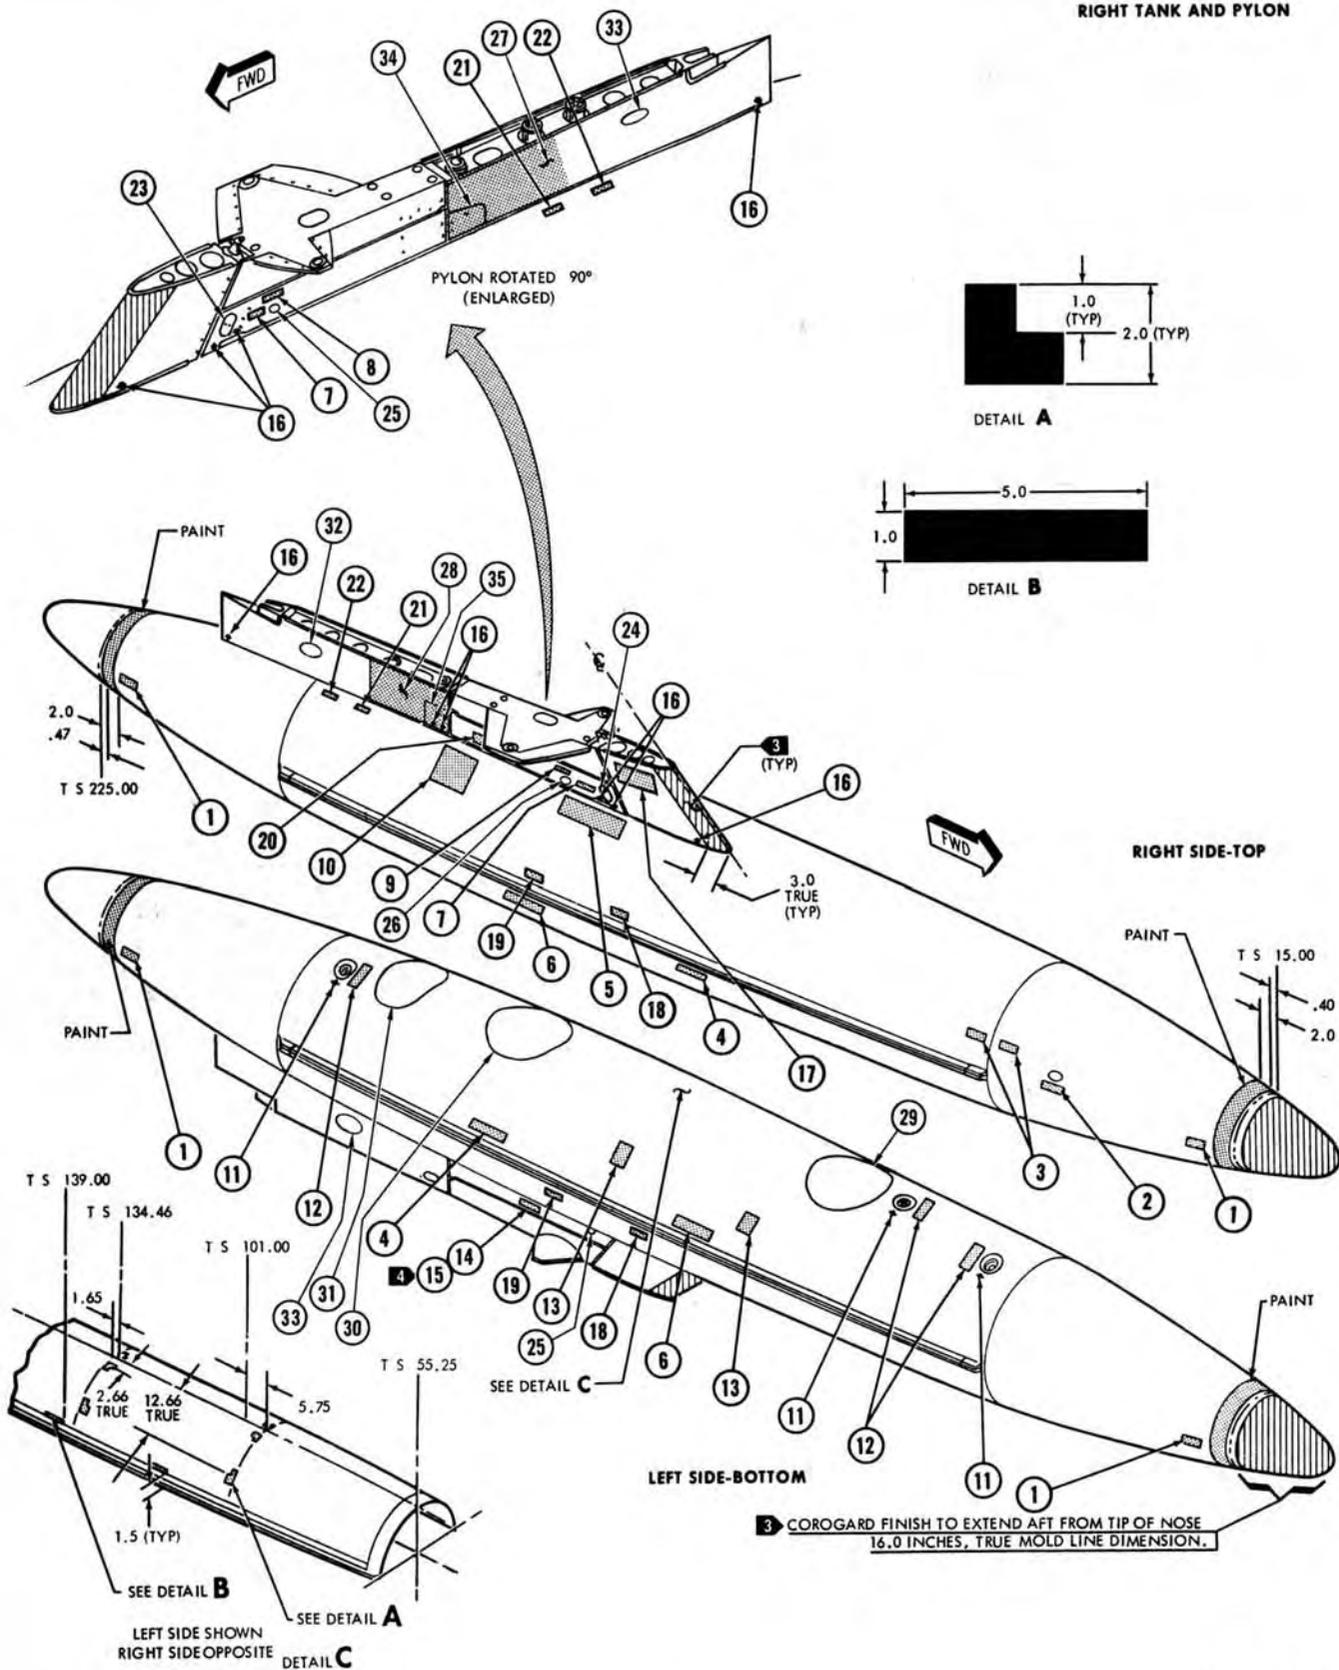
Wing External Fuel Tank and Pylon Markings (Sheet 2)
